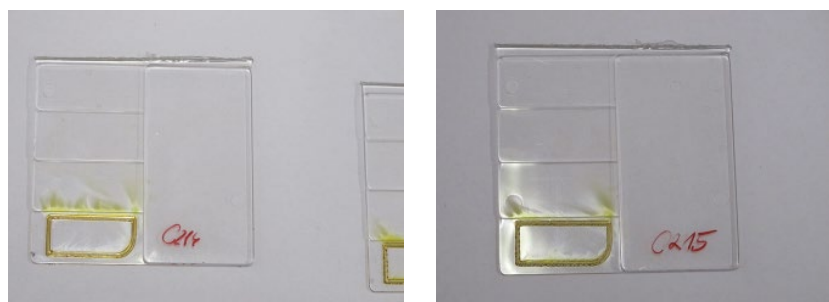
Reduced deposits on the component surface through the use of a shielding gas.
